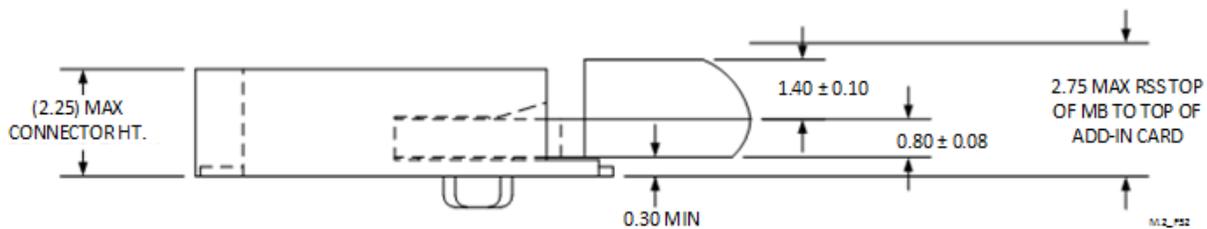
H2.3-S3 – Stack-up Top Mount Single-sided Add-in Card for 1.50 Maximum Component Height
